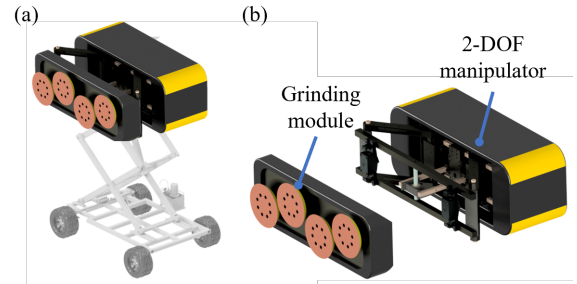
Overall design of proposed grinding robot. (a) The robot positioned on a mobile platform, and (b) components of grinding robot.
